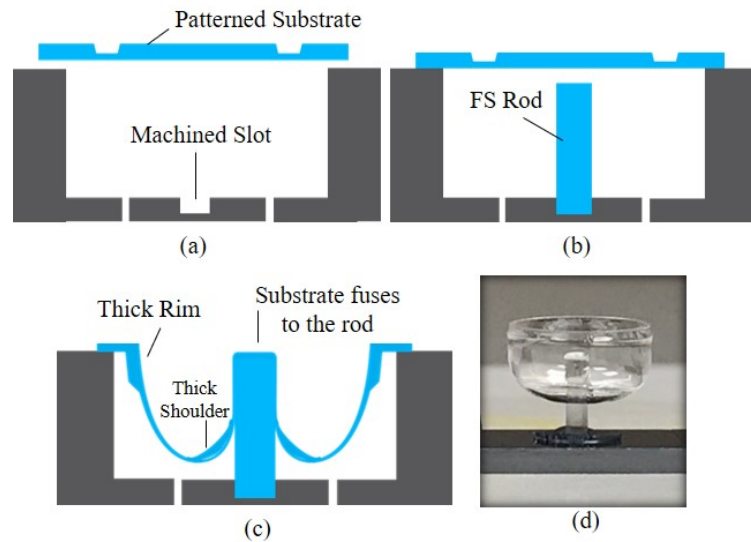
Fabrication process of S-TT type PSI structure. (a) Mold like those for H-XX type PSI is used but the stem is removed, and a slot is machined. (b) FS rod is placed in the slot and the patterned substrate is molded. (c) The substrate deforms forming the thick rim and thick shoulder fusing to the solid stem. (d) Photograph of a singulated PSI device.
